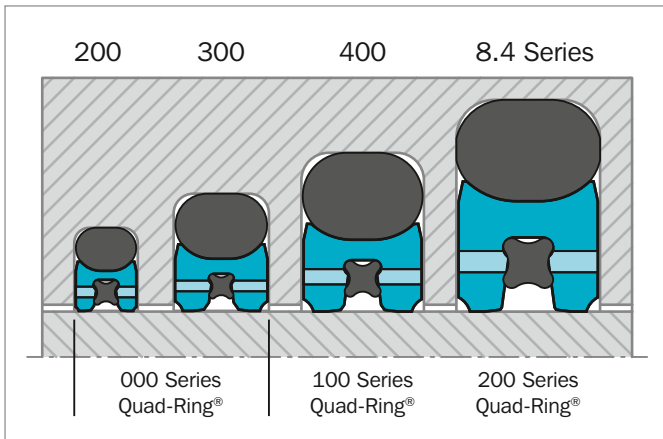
Cross-section profiles of available standard seal series for shaft and bore sealing dependent on Series No.
